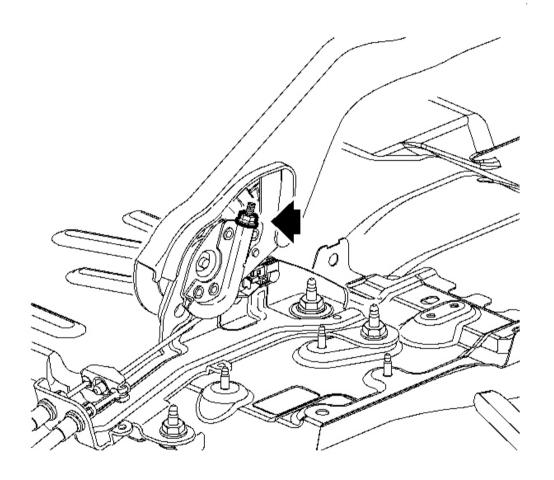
View Of Park Brake Courtesy of GENERAL MOTORS CORP.
